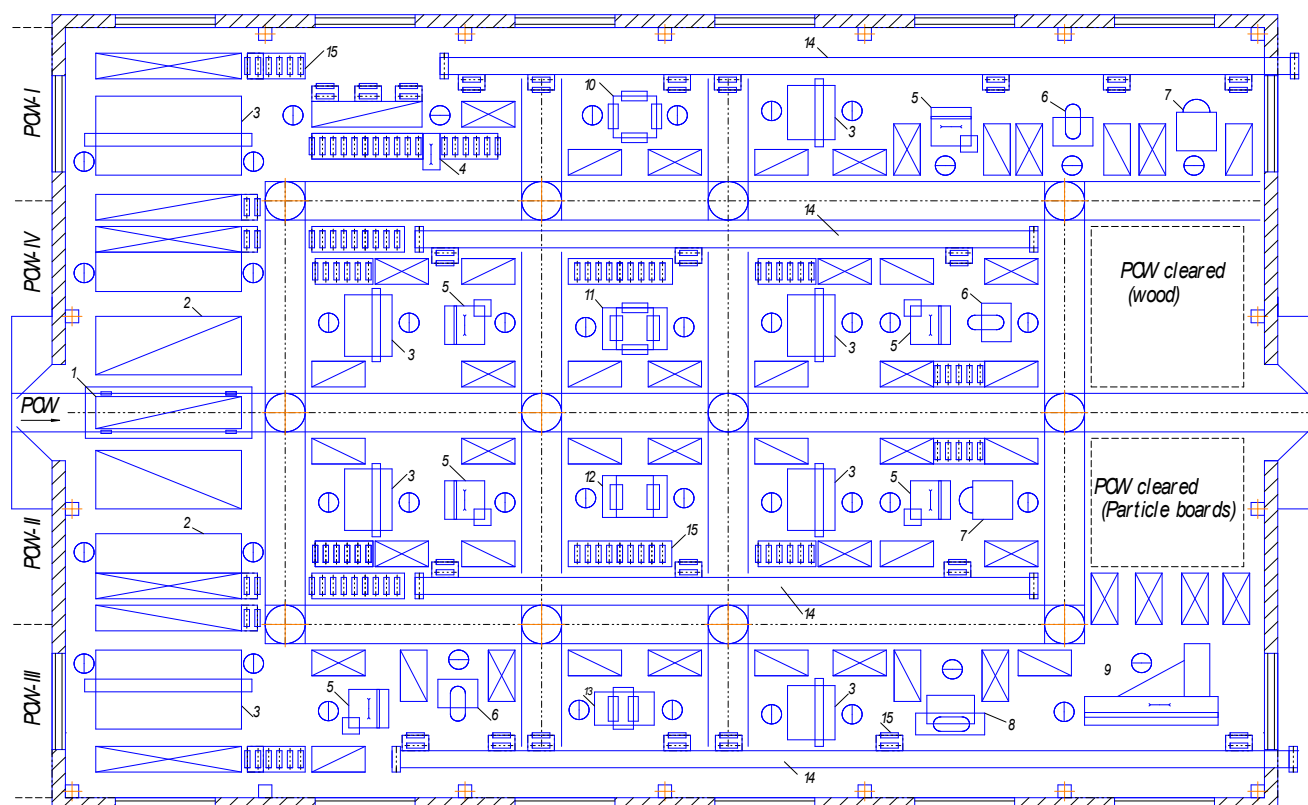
Equipment for PCW preparation – sorting, segregation and cleaning: 1 – traversing carriage; 2 – bench, worktable; 3 – metal detector; 4 – trimmer; 5 – circular saw; 6 – band mill; 7 – milling machine; 8 – enge sander; 9 – sizing machine; 10 – four-sided sander; 11 – four-sided needle milling machine; 12 – double-needle milling machine; 13 – double milling machine; 14 – conveyor; 15 – roller conveyor sections
